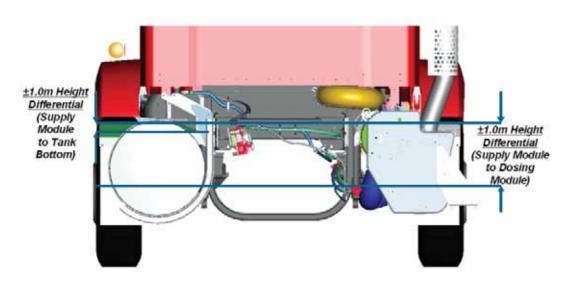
RH Under Cab Exhaust with Clear Back of Cab Tank.
